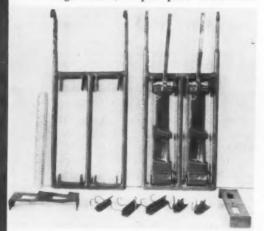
View showing baffle plates, clips and racks used for electro-chemical machining.
